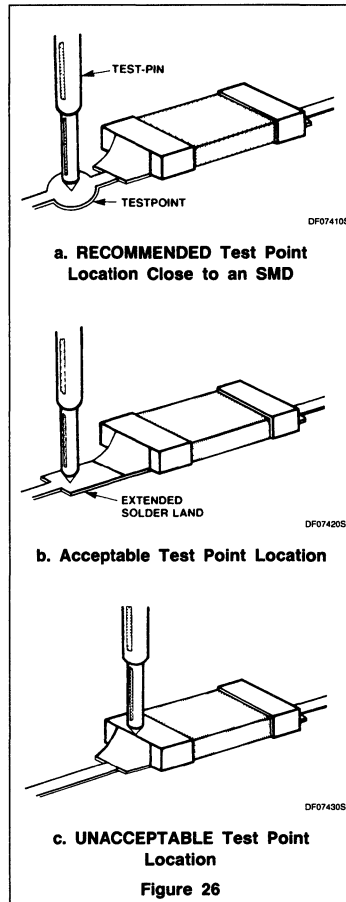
shows the recommended approach for positioning test-points in tracks close to components, and Figure 26b shows an acceptable (though not recommended) alternative where the solderland is extended to accommodate the test pin. This latter method avoids sacrificing too much board space, thus maintaining a high-density layout, but can introduce the problem of components moving ("floating") when reflow-soldered. The approach shown in Figure 26c is totally unacceptable since the pressure applied by the test pin can make an open-circuit soldered joint appear to be good, and, more importantly, the test pin can damage the metallization on the component, particularly with small SMDs.
